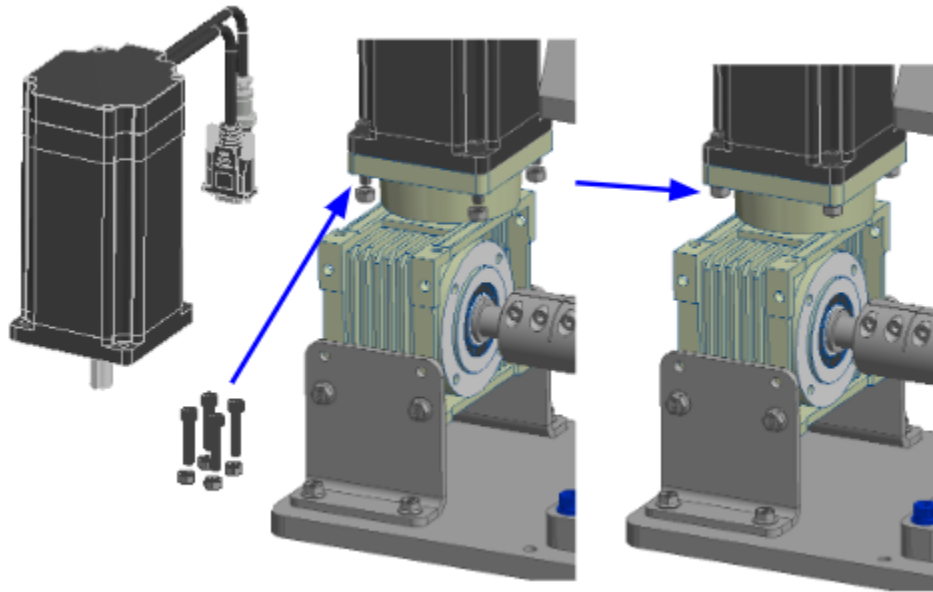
NEMA 34 stepper motor installed into the gearbox
